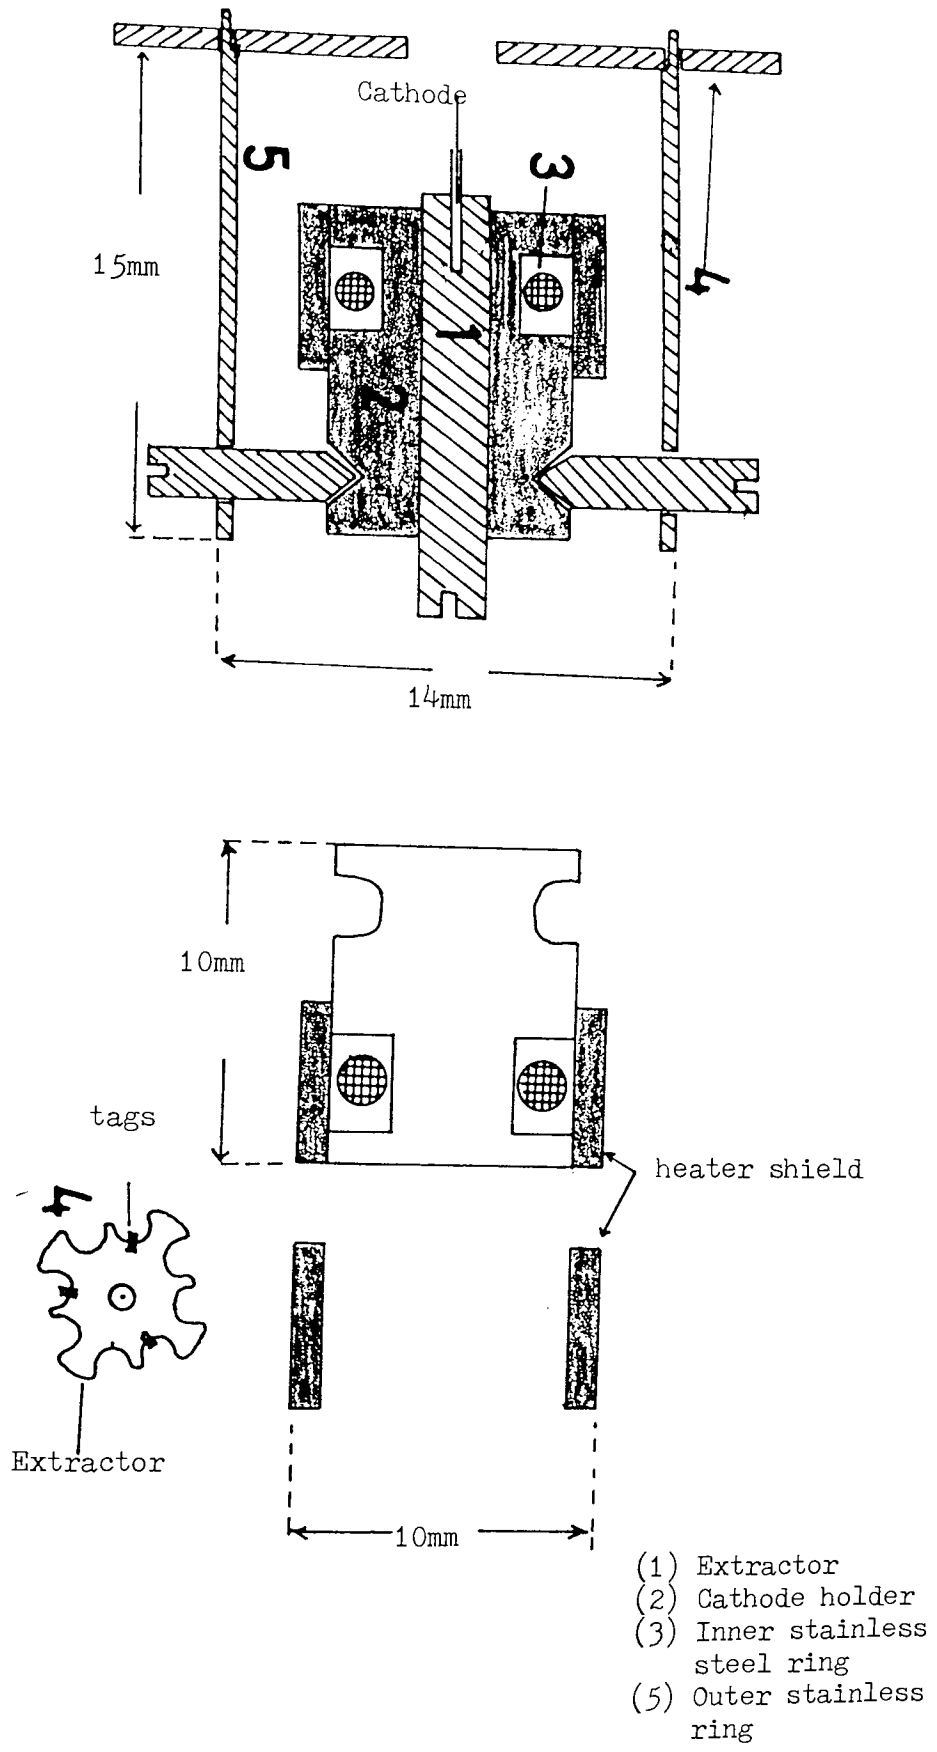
Cathod - extractor assembly for miniature C.R.T
